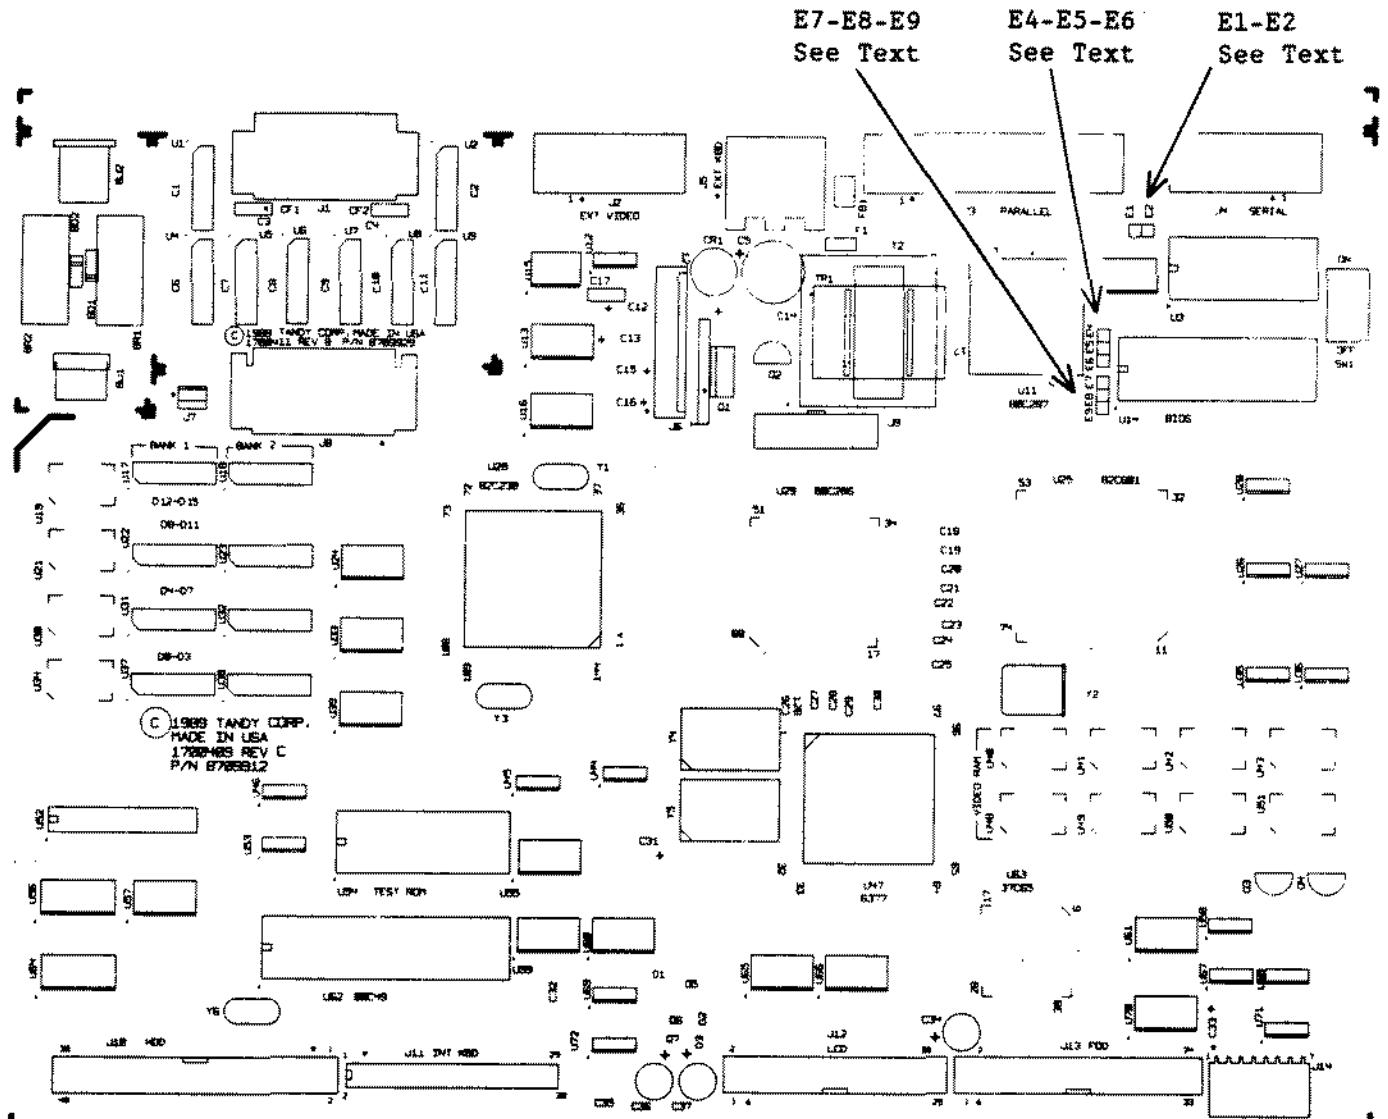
Tandy 1100FD Main Logic Board - Solder Side
